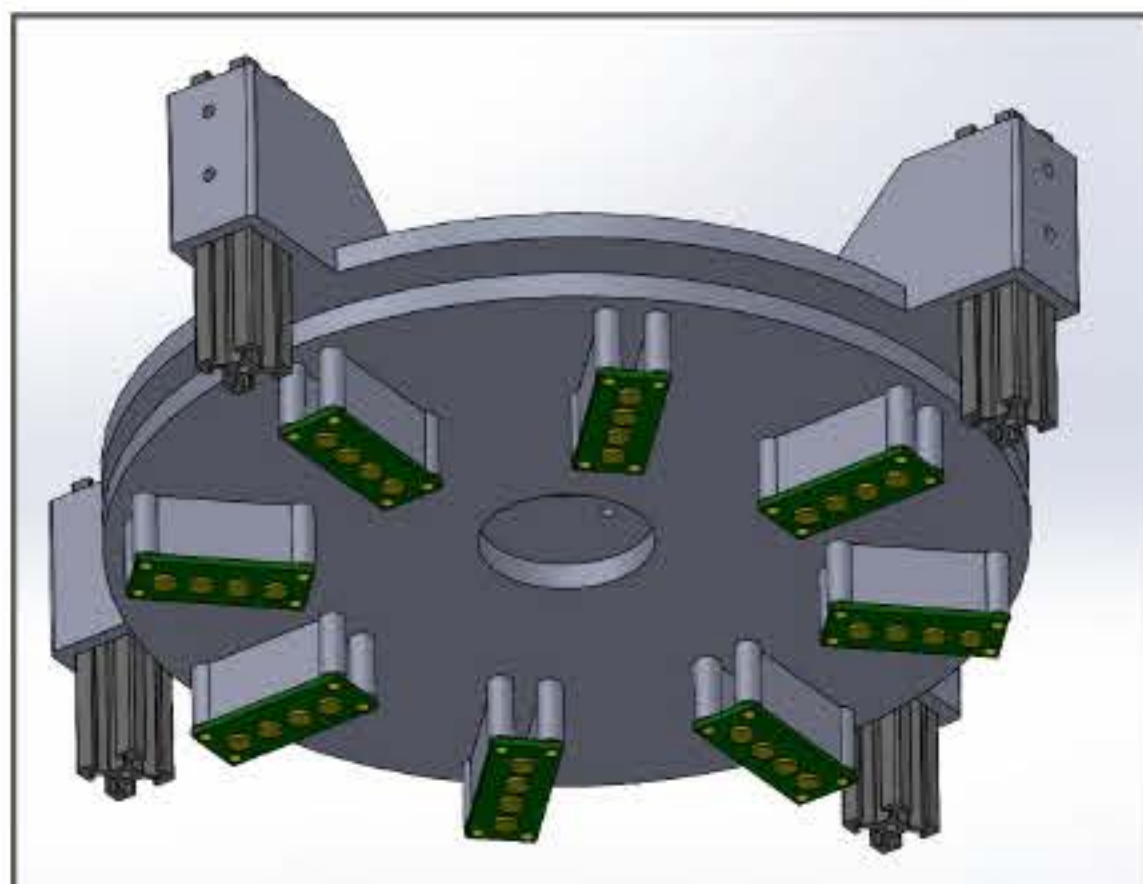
Split view of the ACTS assembly in SolidWorks, showcasing the top half with smaller "contact" PCBs mounted.
